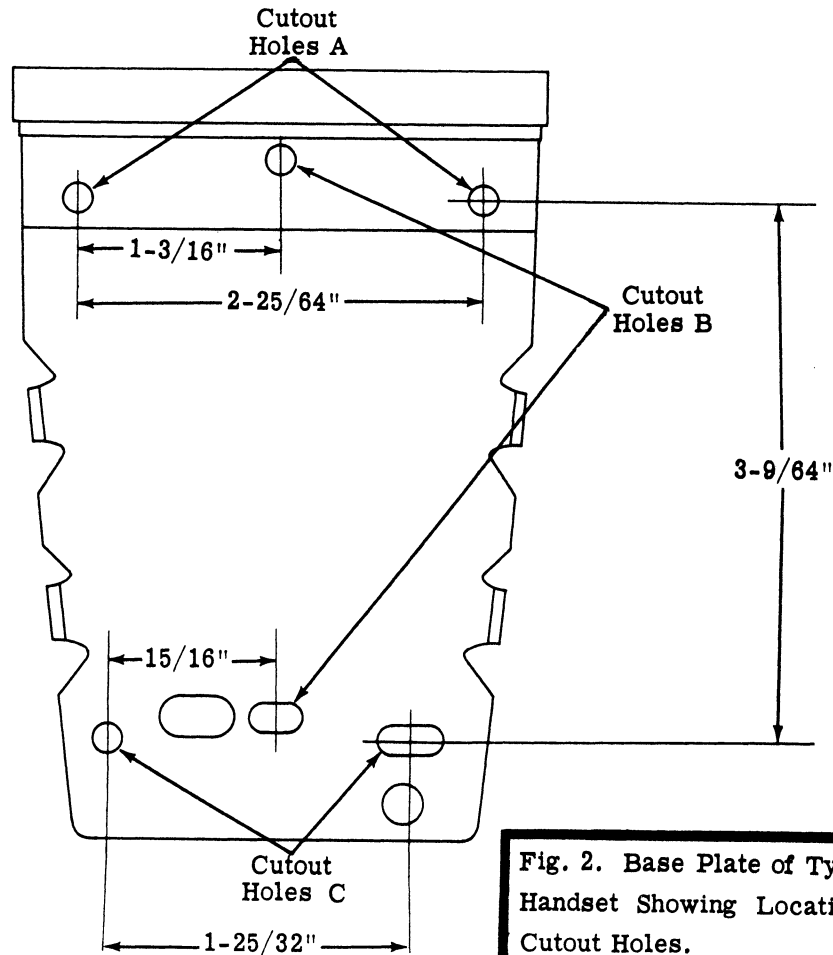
Base Plate of Type 183 Handset Showing Location of Cutout Holes.
